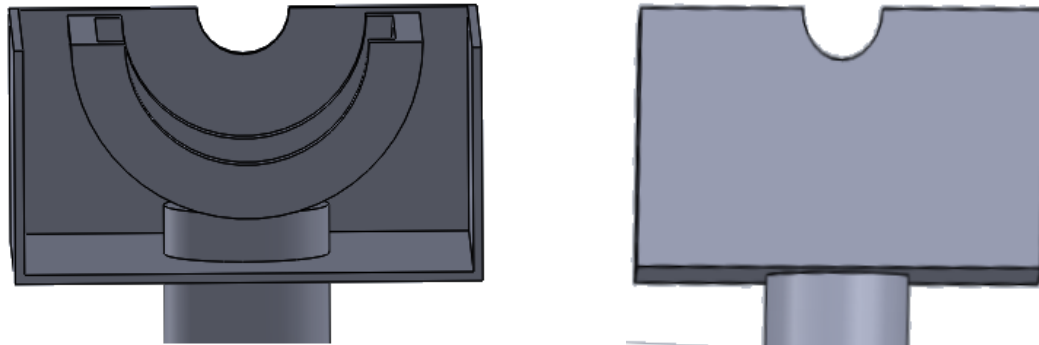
CAD drawing of the first design of bearing housing and oil tank
